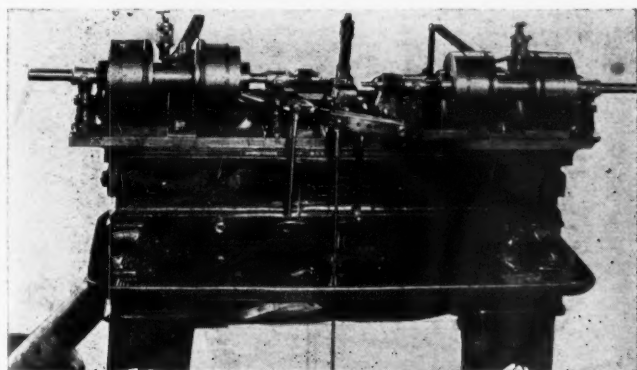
Mahan combination two-spindle drilling and tapping machine, floor type.
